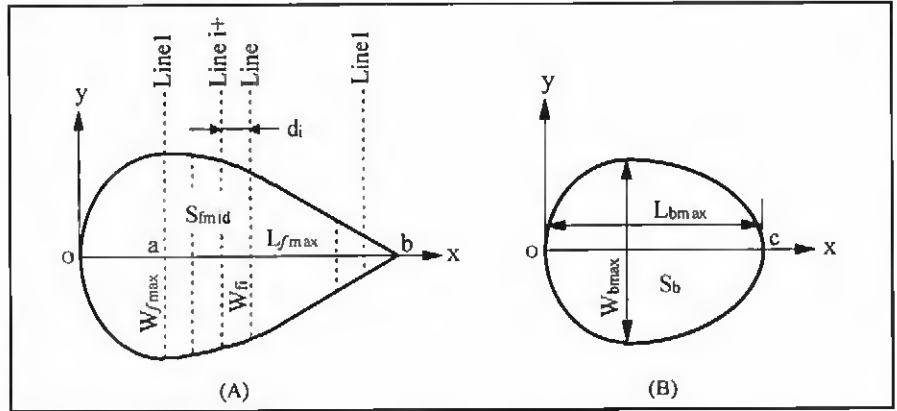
Definitions of the topside size and shape parameters of the weld pool. A — Topside; B — backside.
